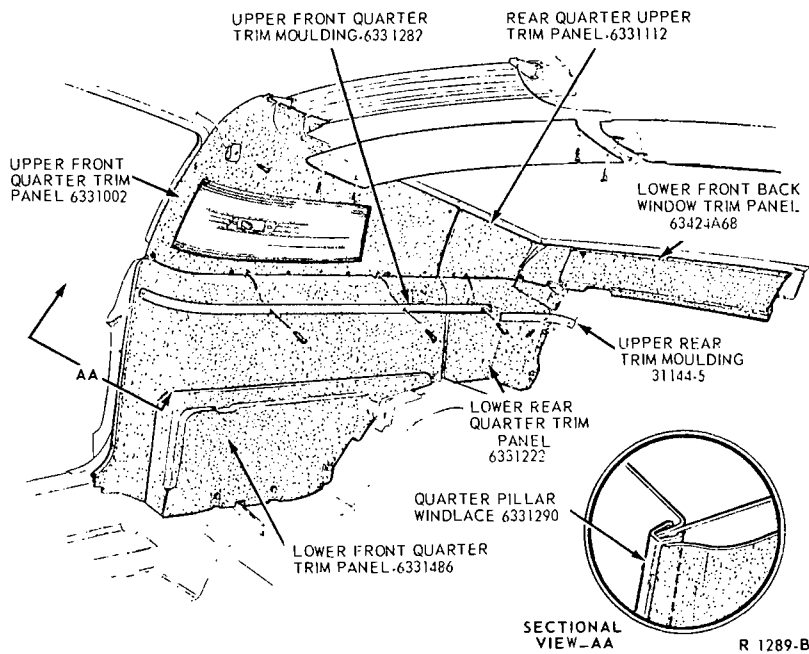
Interior Moulding and Quarter Trim Panel Installation—Mustang Model 63
